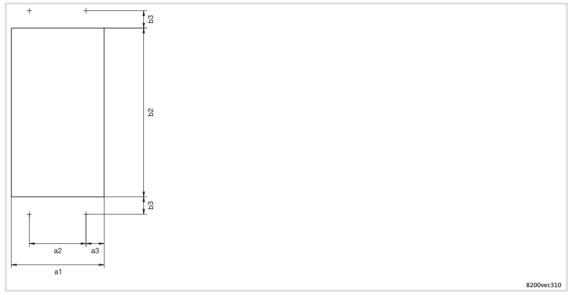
Dimensions for thermally separated mounting cutout 3 ... 11 kW
